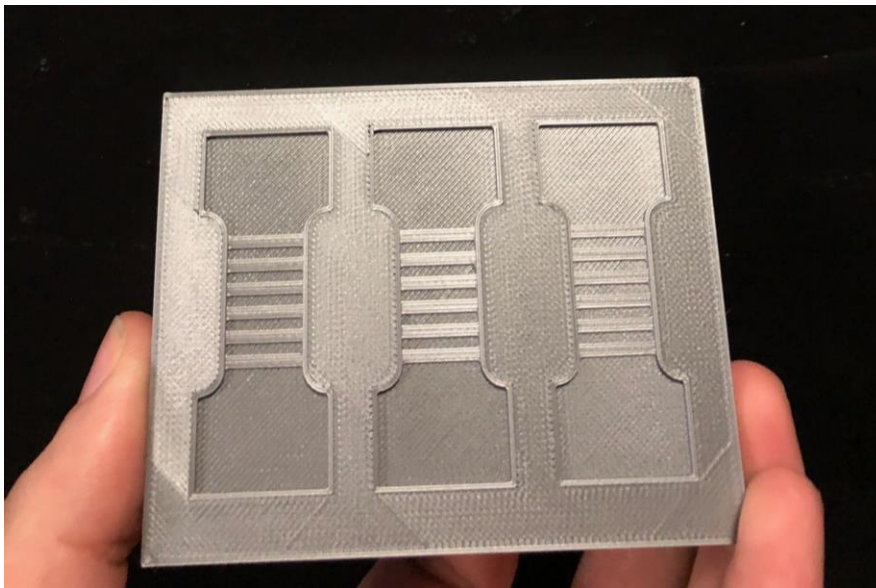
3D Printed Ribbed Dog Bone Structure Mold
